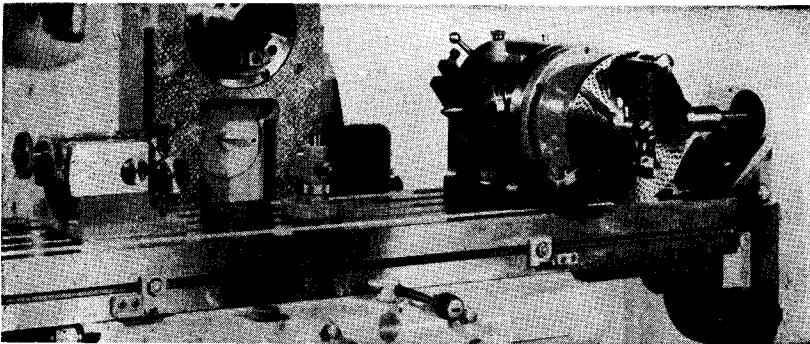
The Cincinnati index centers. The head is on the right end of the table. (*The Cincinnati Milling Machine Company*)
